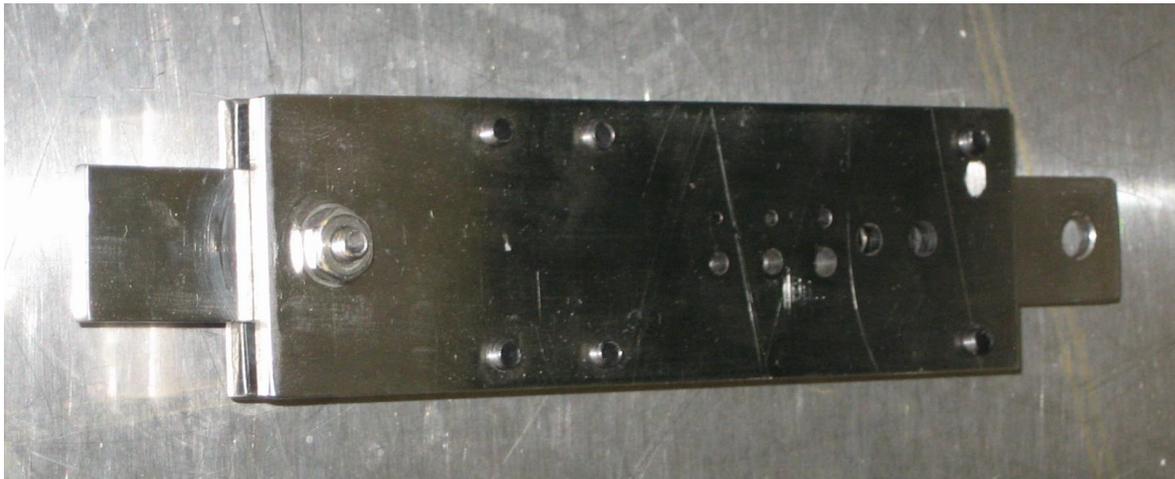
Shear tool used for shearing tests with sliding plate in the middle.
